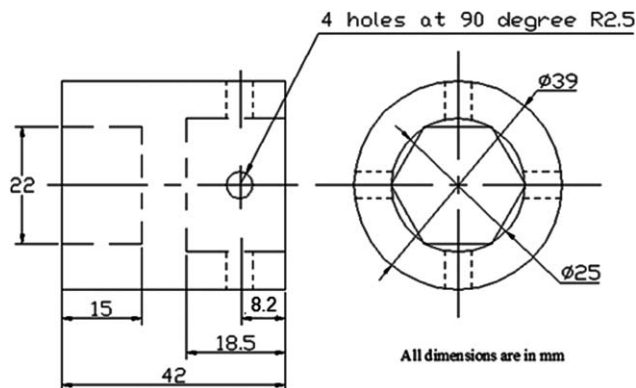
Aluminum specimen holder used for attaching thin-walled tubular specimens with hexagonal flanges to the elastic bars.
